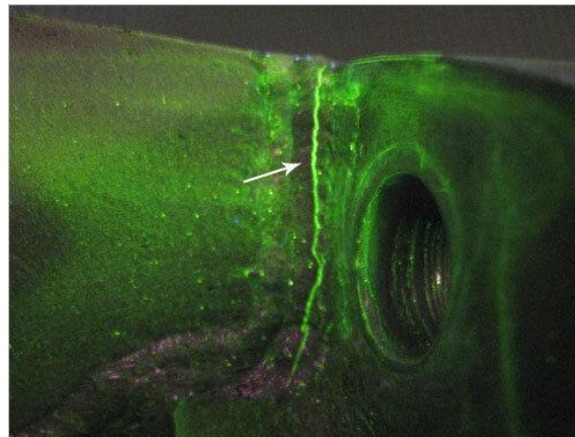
Example of crack detected on a weld after penetrant inspection.
